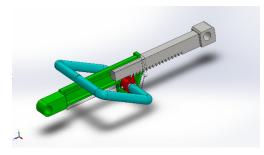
Assembled view of automatic reverse locking rack mechanism
